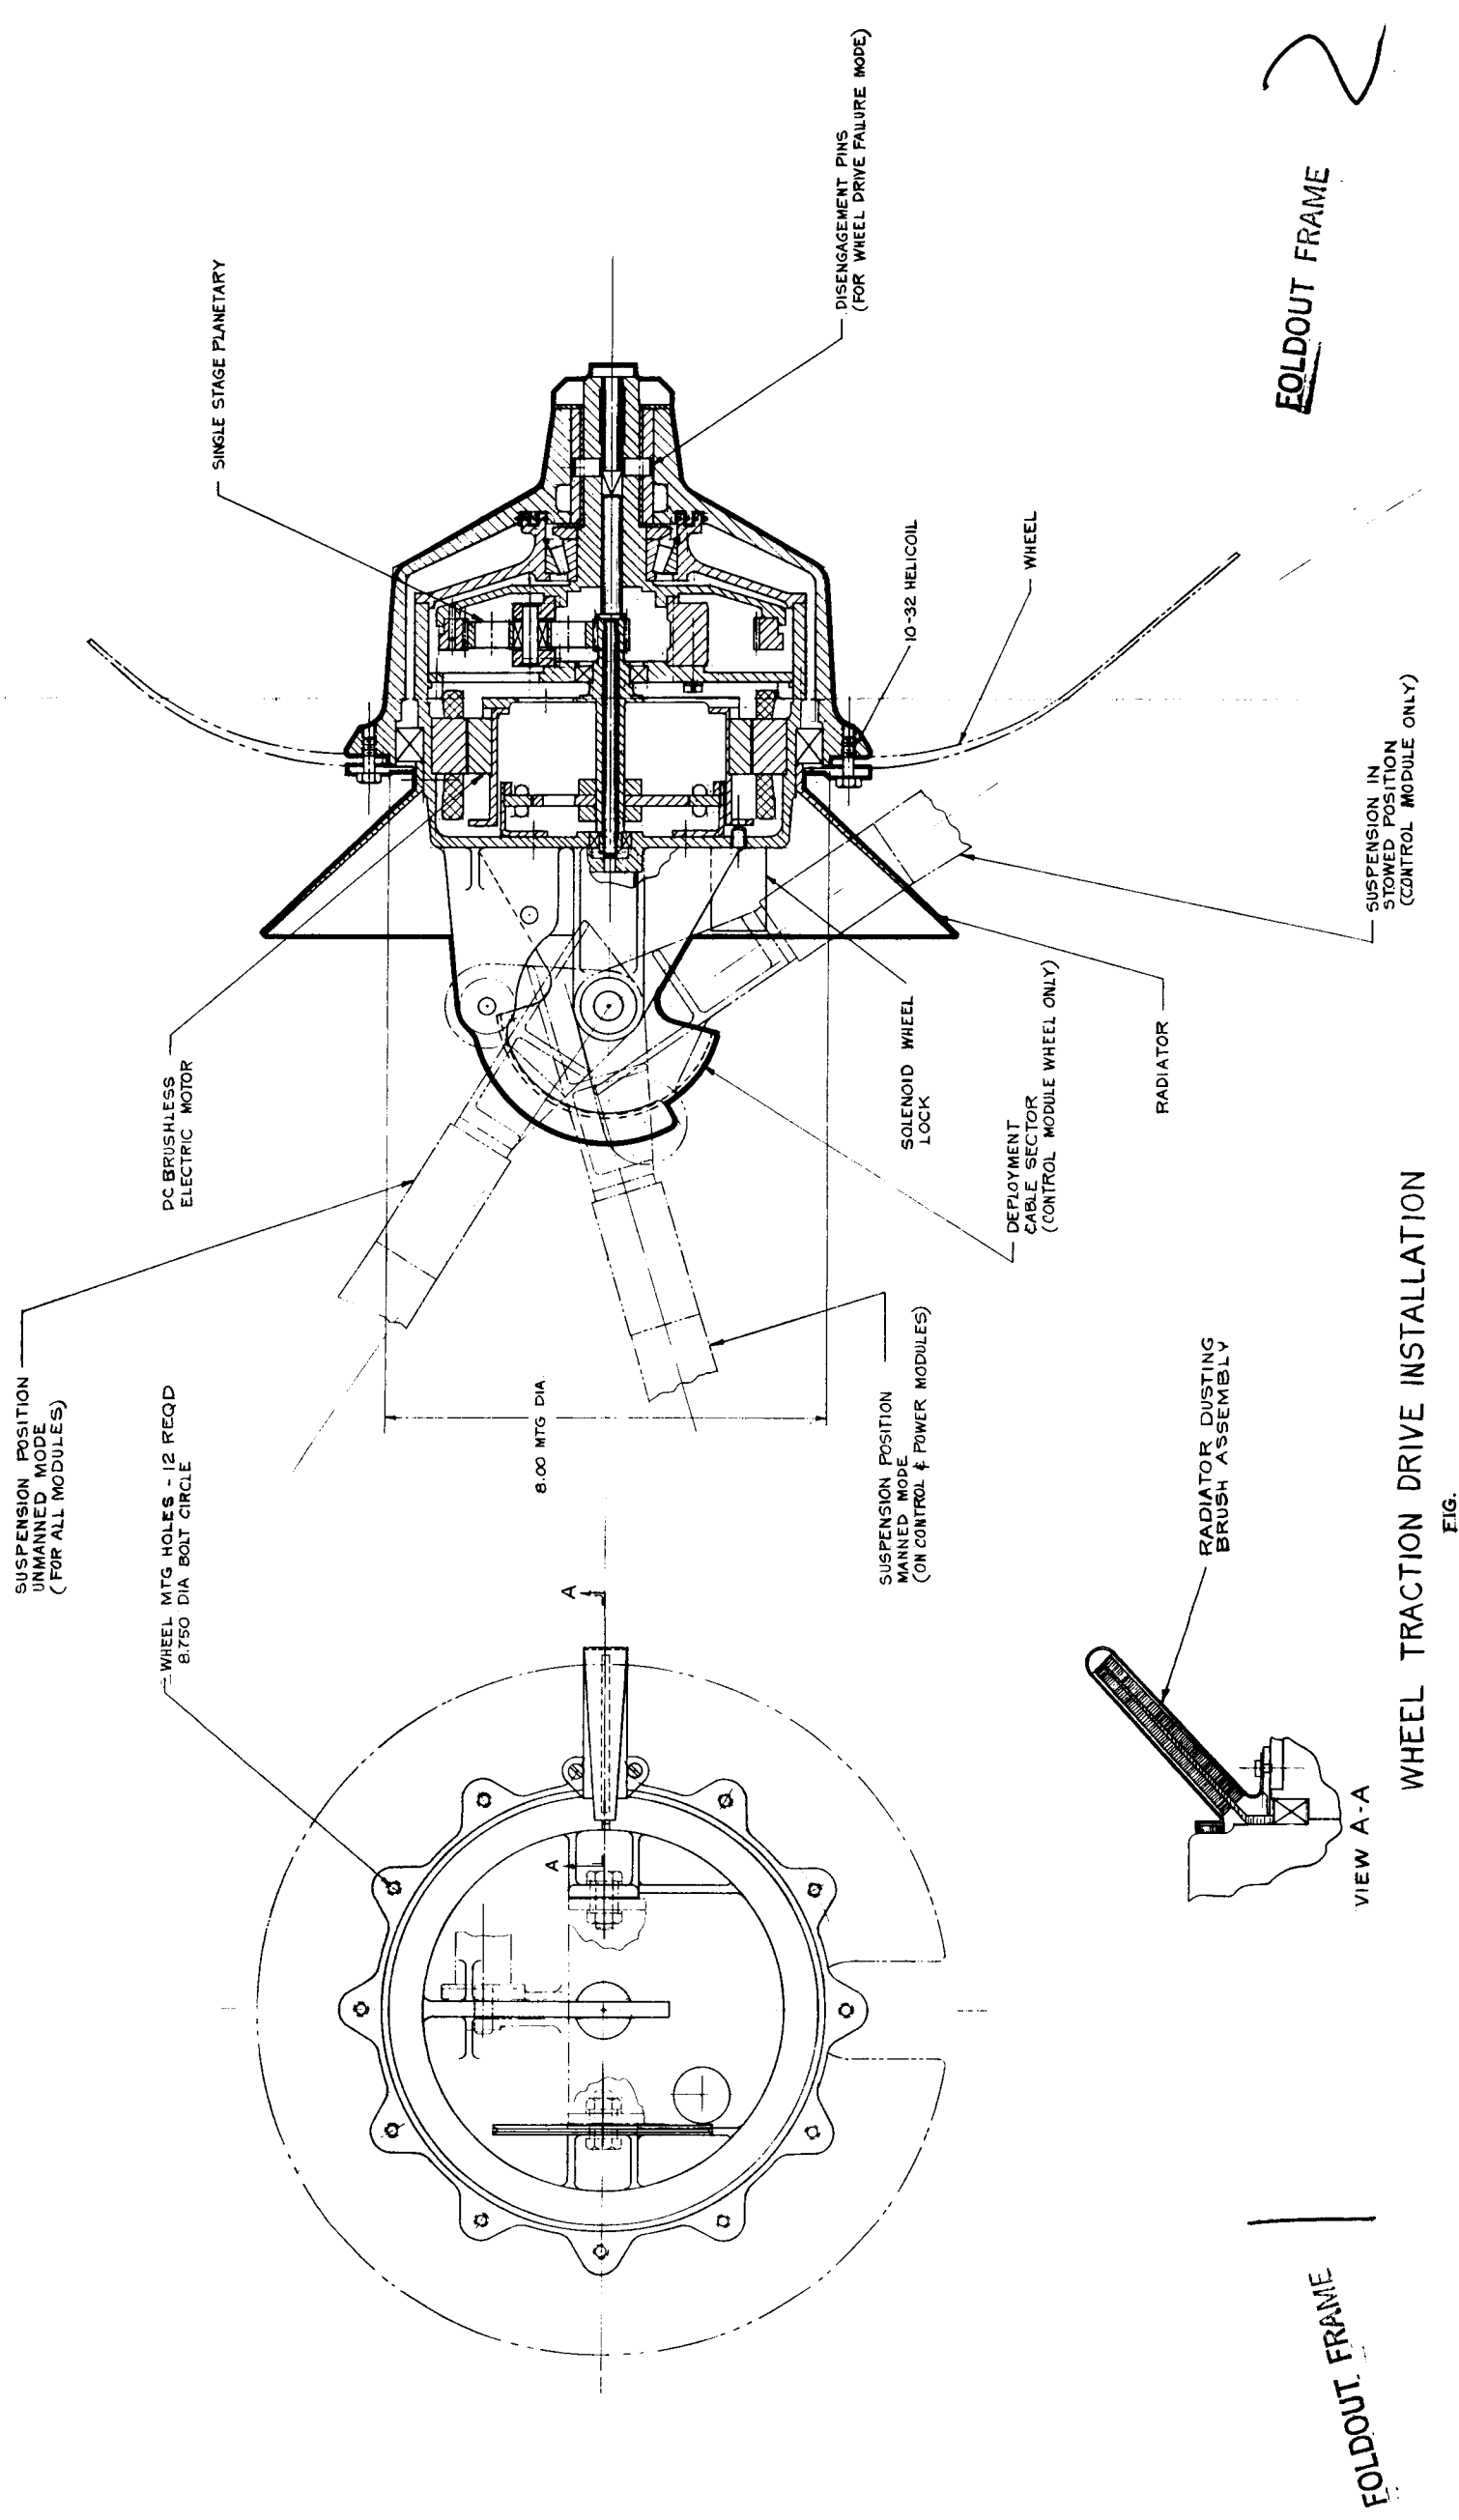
DLRV WHEEL DRIVE ASSEMBLY
